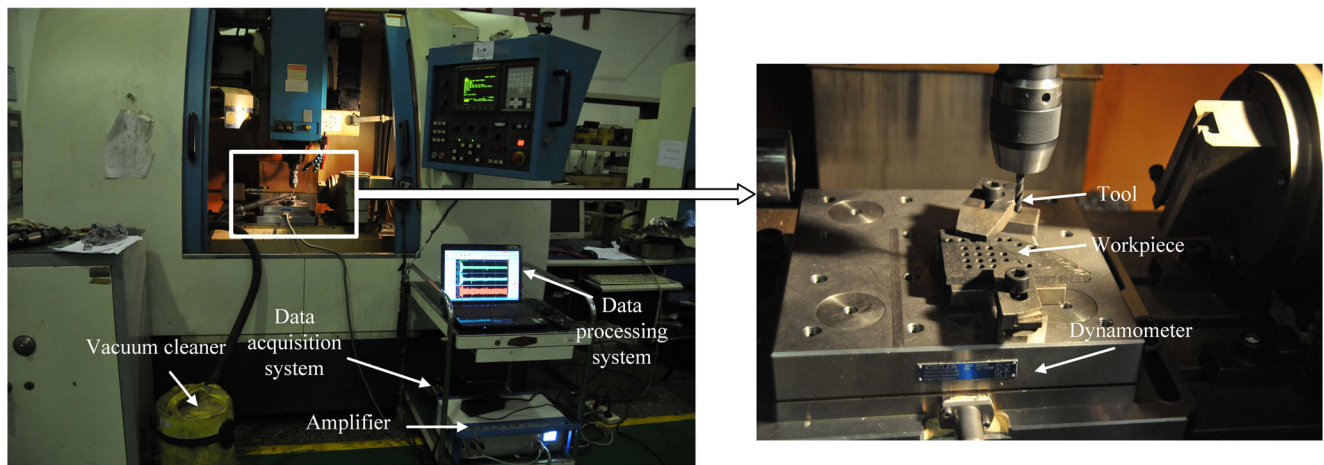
Experimental setup for drilling 2.5D C/C composite plate
